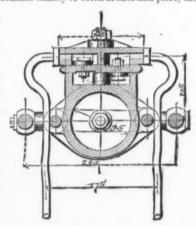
Section Through Cylinder and Valve Box of Compressor.
